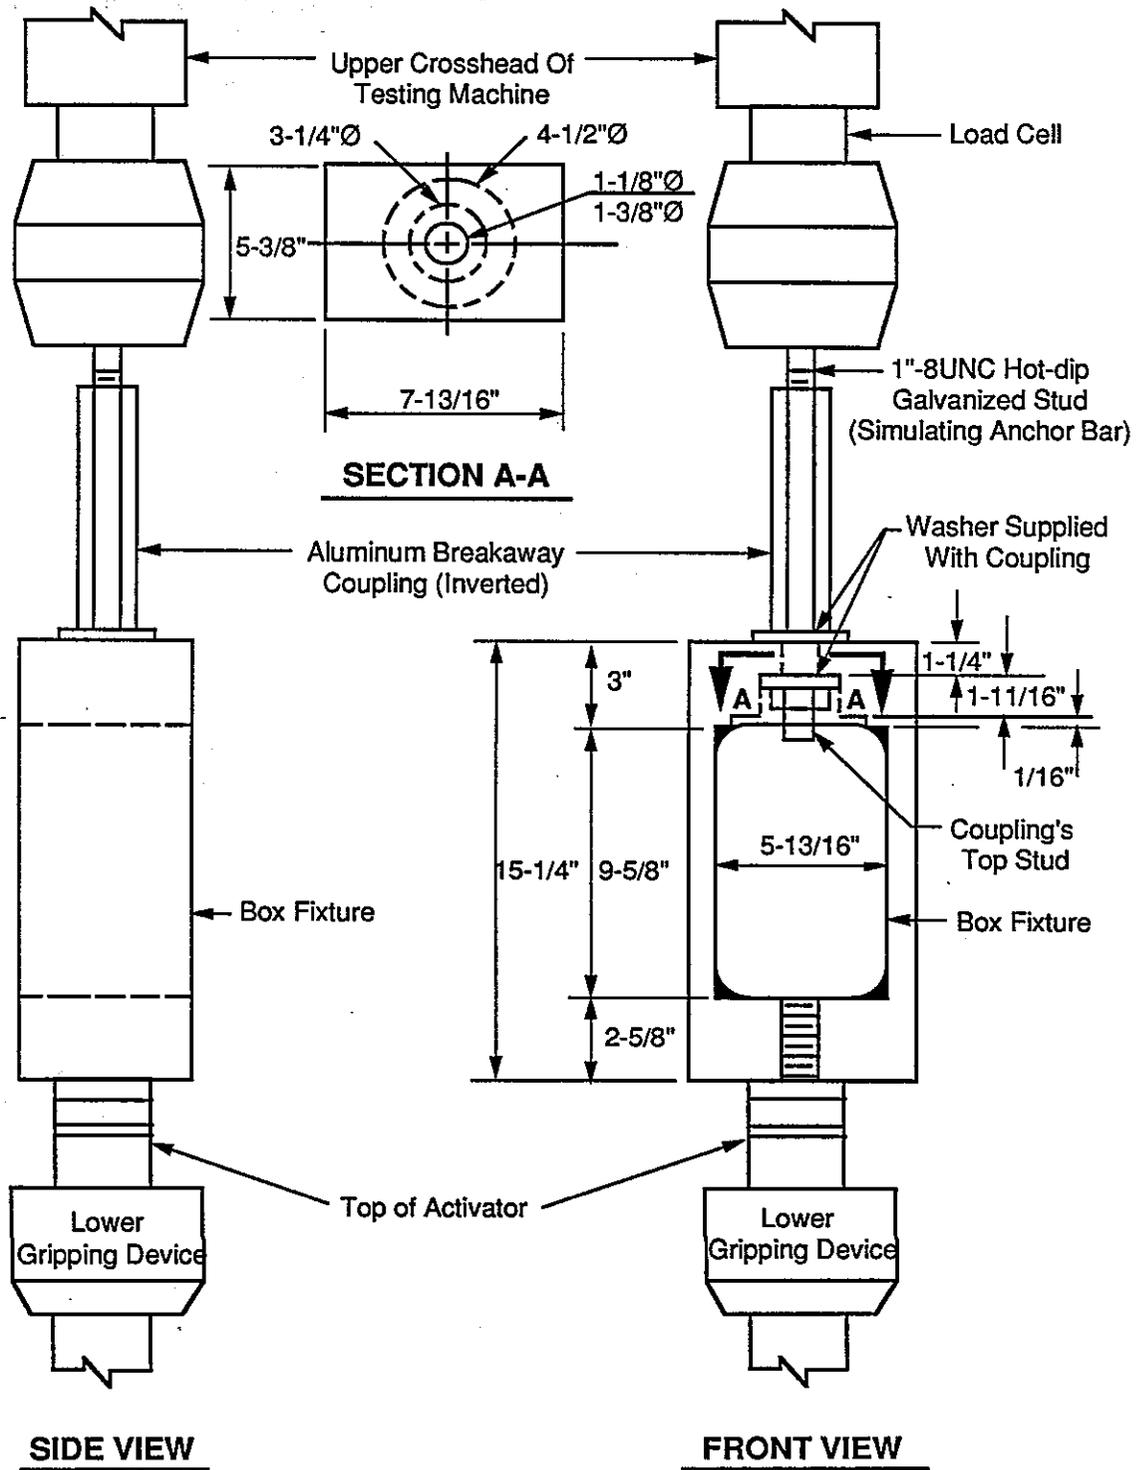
Test Fixture for Determining Fatigue Life of Aluminum Couplings
